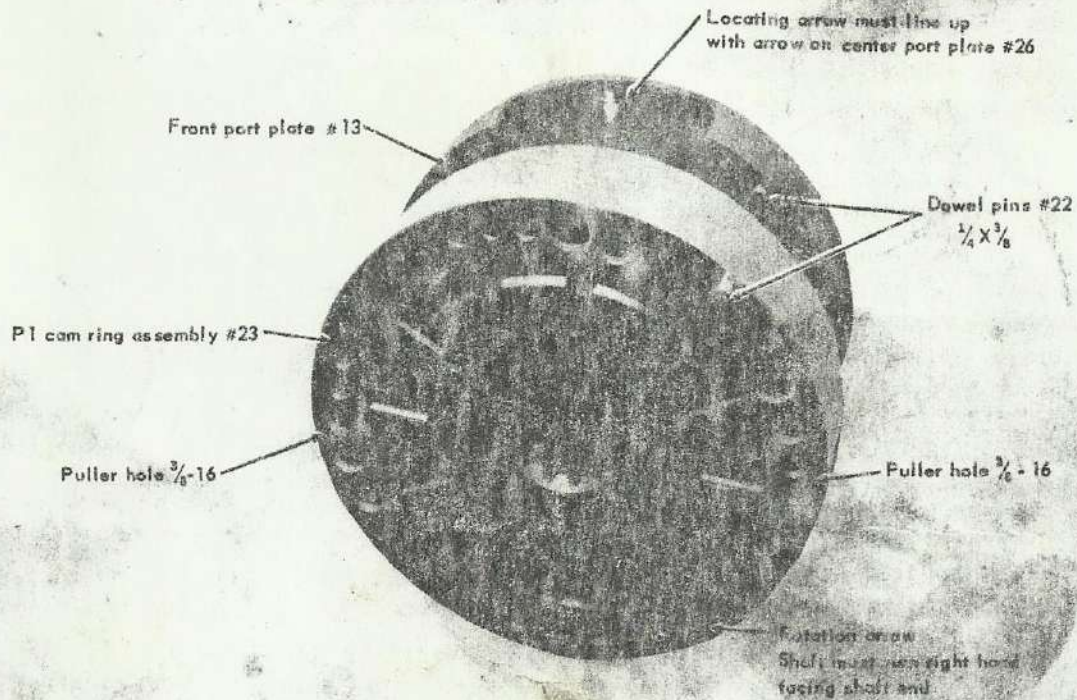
Above parts must be assembled in this manner in the mounting cap and over the pump shaft for right hand operation.
